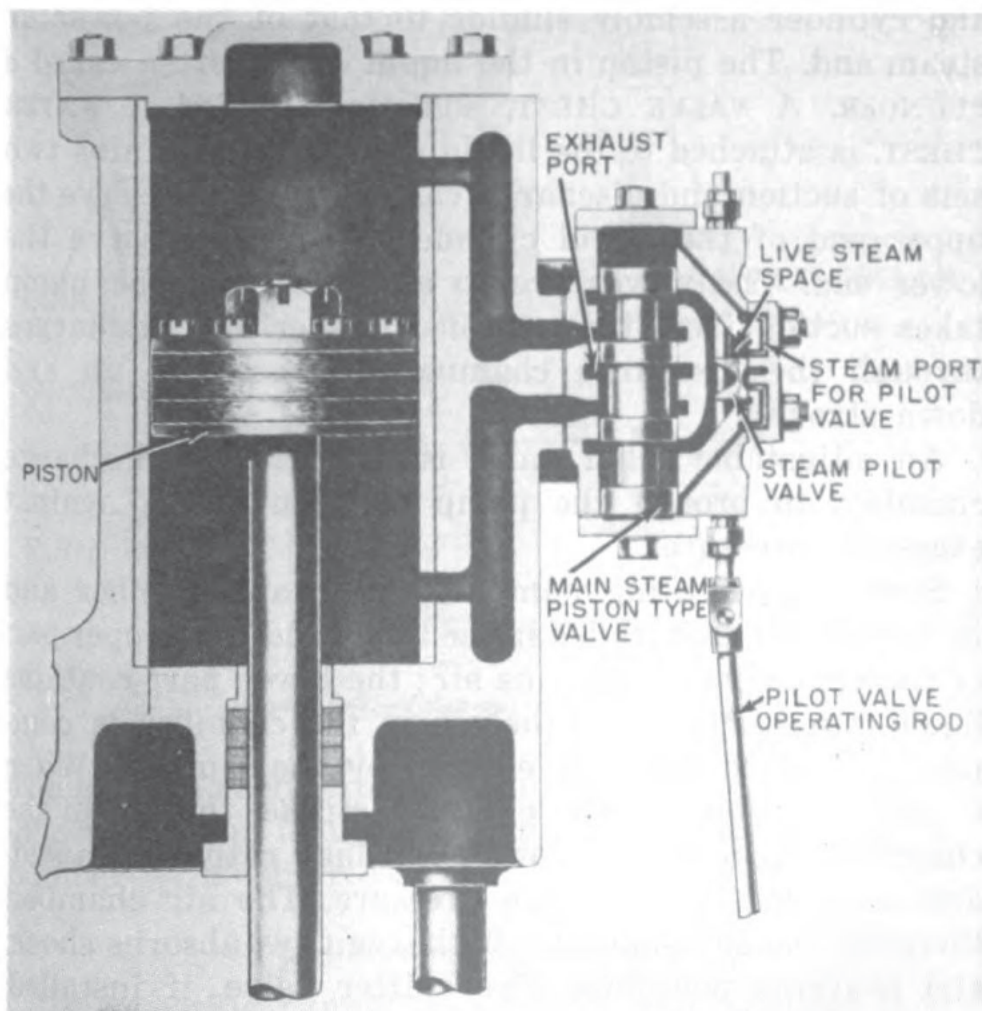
Piston-type valve gear for steam end of reciprocating pump.
